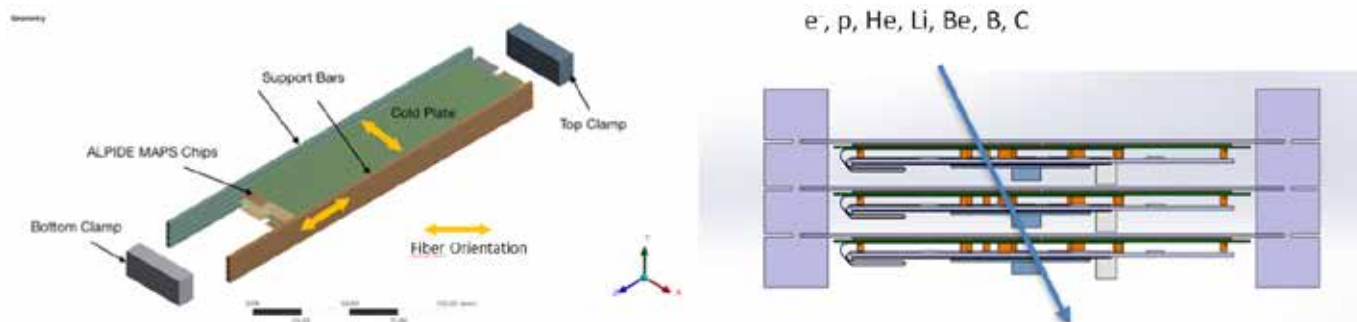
(left) The exploded-view drawing of model 1 showing the mechanical unit with the CFRPs fiber orientation; (right) The cross-section of a mechanical unit showing the three cold plates clamped to the support bars and a bunch of particles crossing the three layers.
